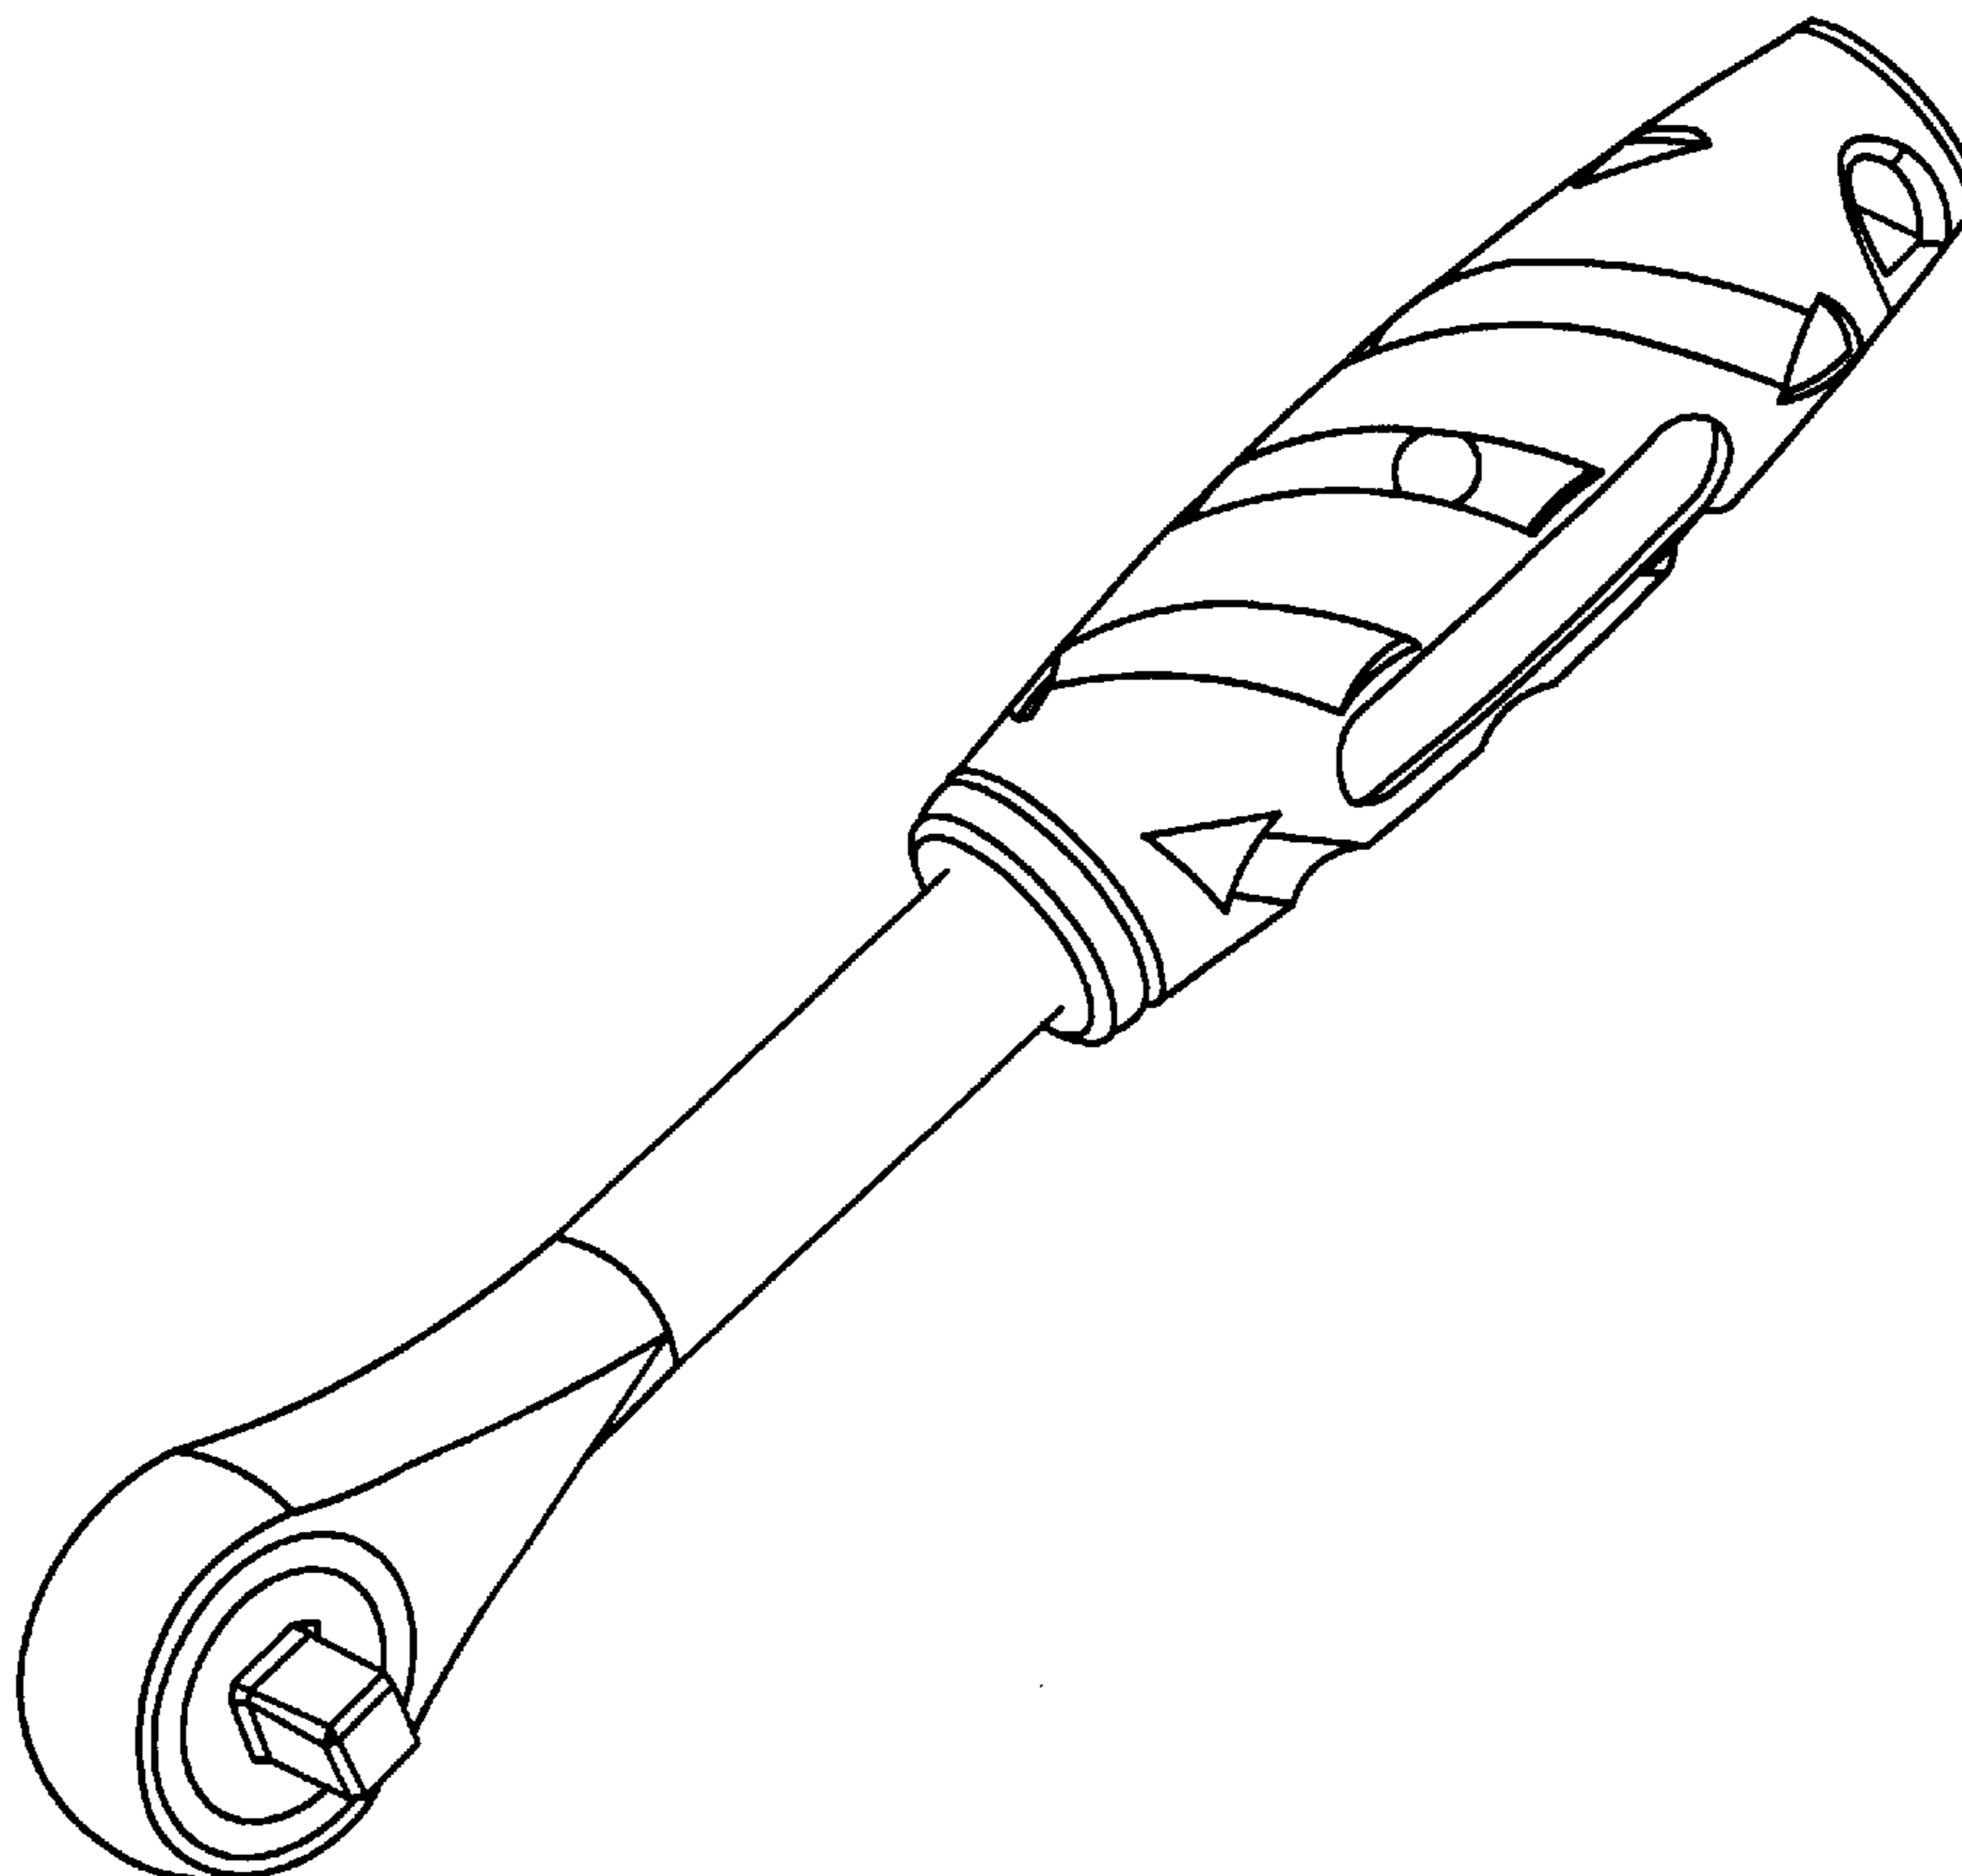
is a front elevational view showing the embodiment of my design for a twist handle wrench;
